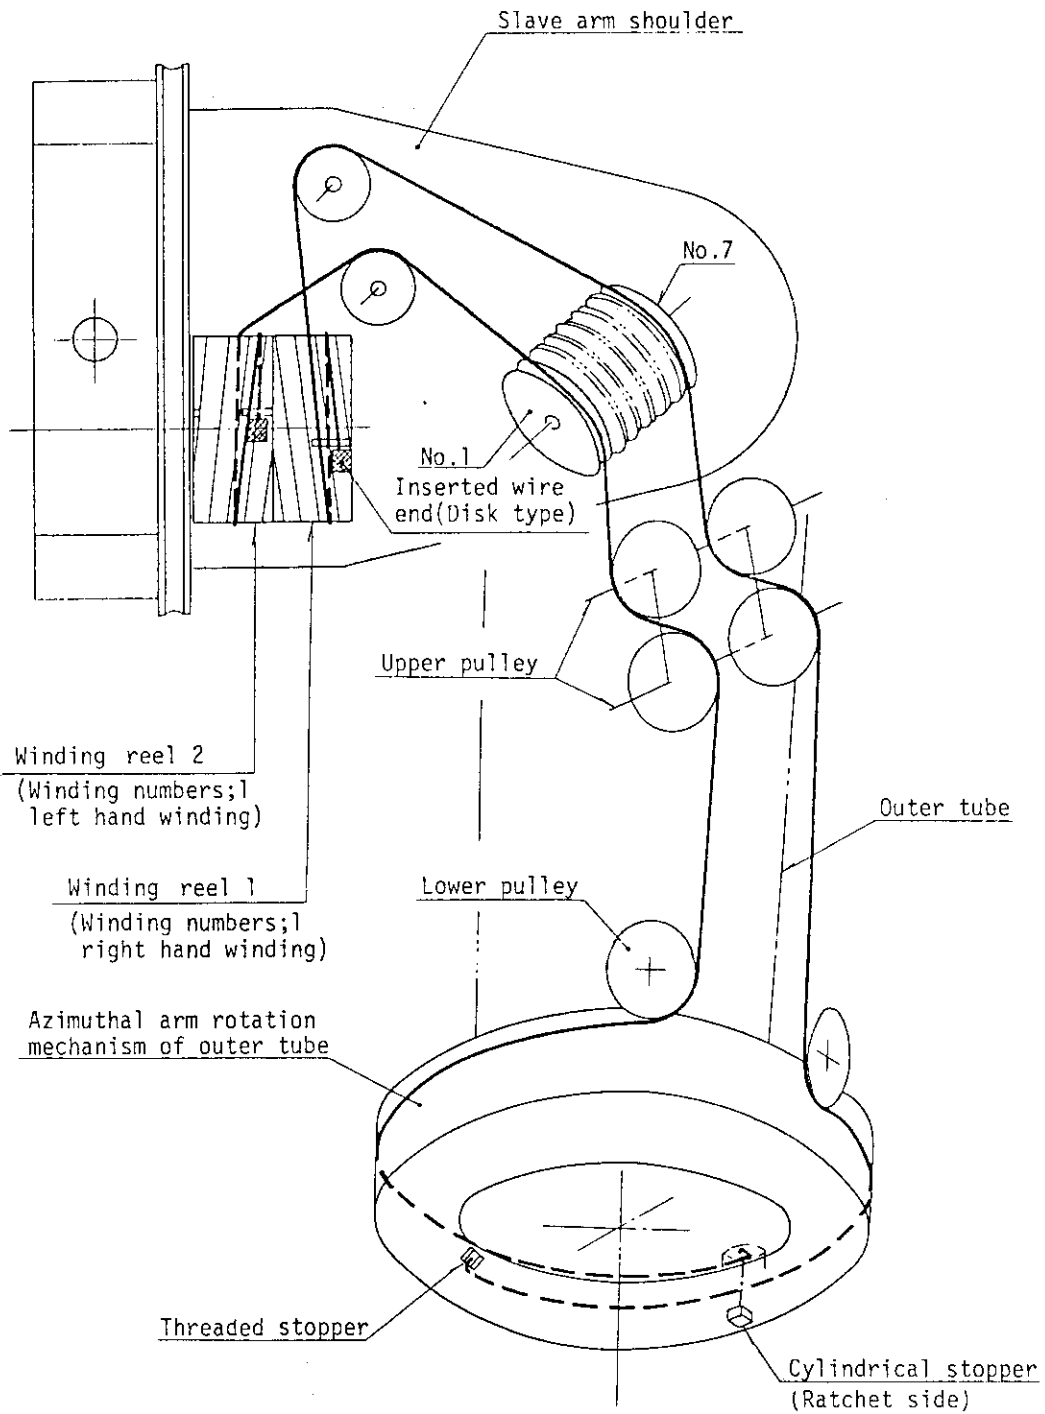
Perspective view of azimuthal slave arm rotation mechanism of the type A 100 standard manipulator
